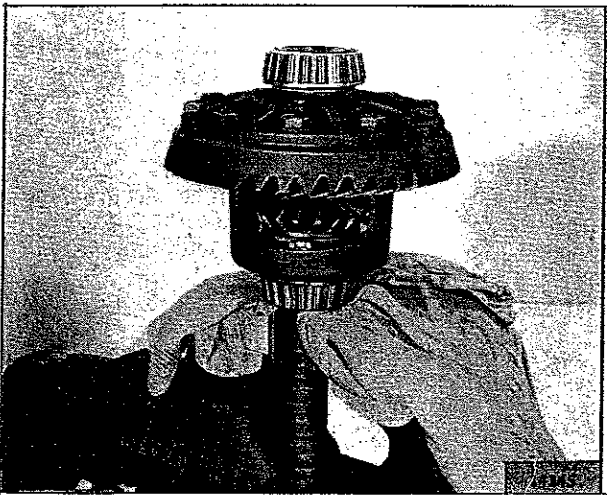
DIFFERENTIAL POSITIONED ON AXLE SHAFT
